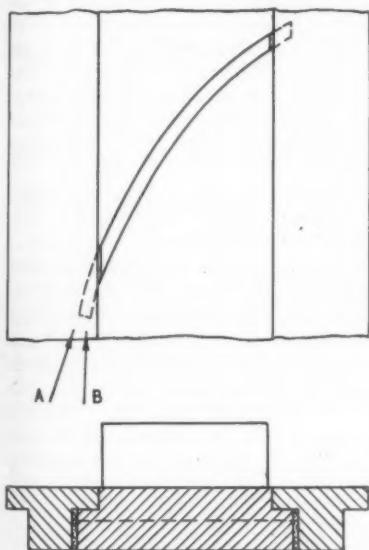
Detail view showing how the blades are retained in their carrier rings by T-section spacer rings
